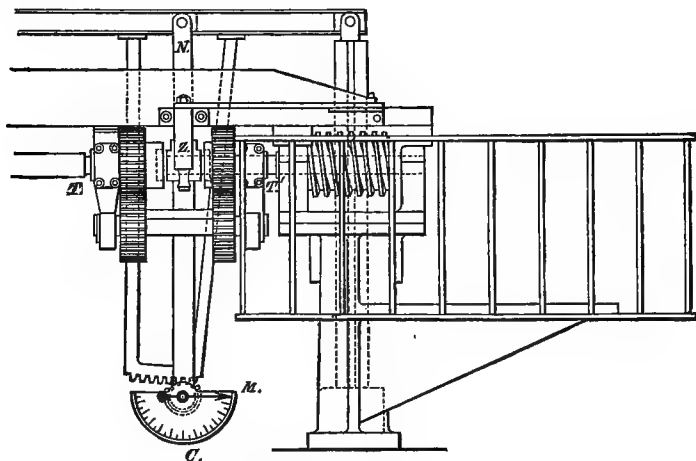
Detail of the tipping gear of Chatillon & Commentry's plate mill.
